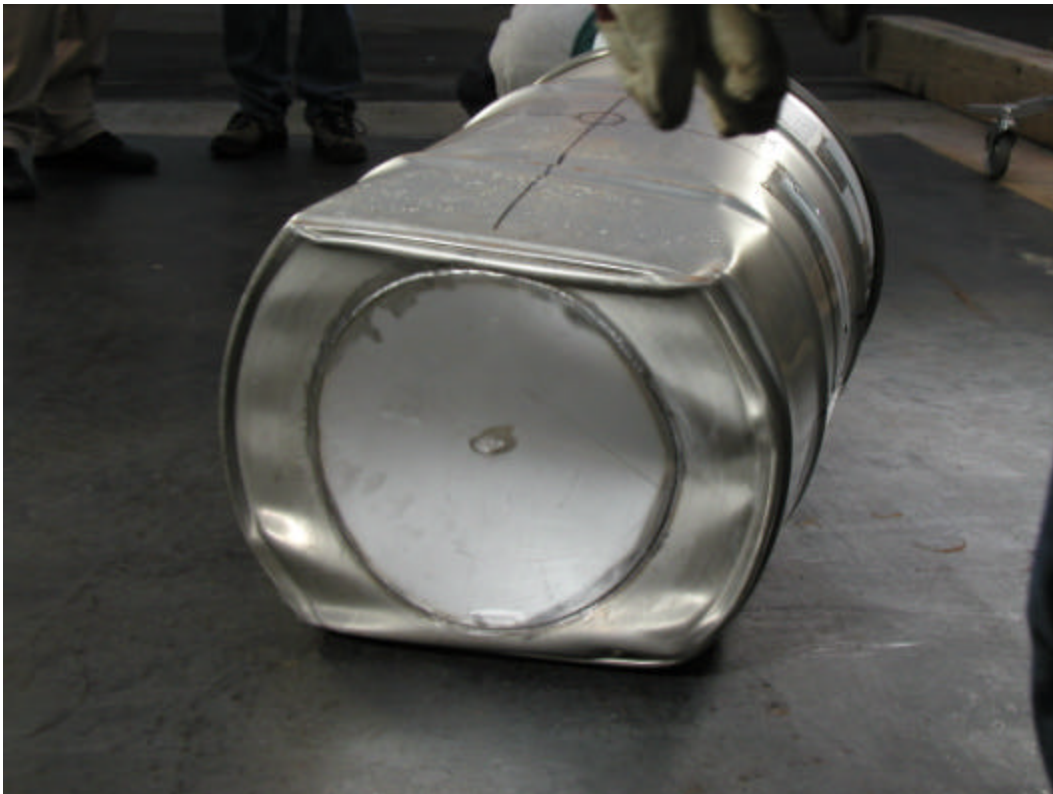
Damage to the bottom end of TU-3 from the crush test – the 180° line is on top.
